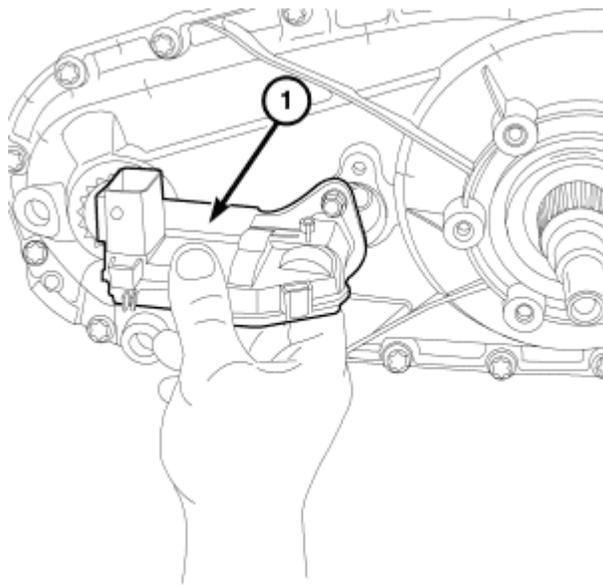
Removing/Installing Shift Motor O-Ring
